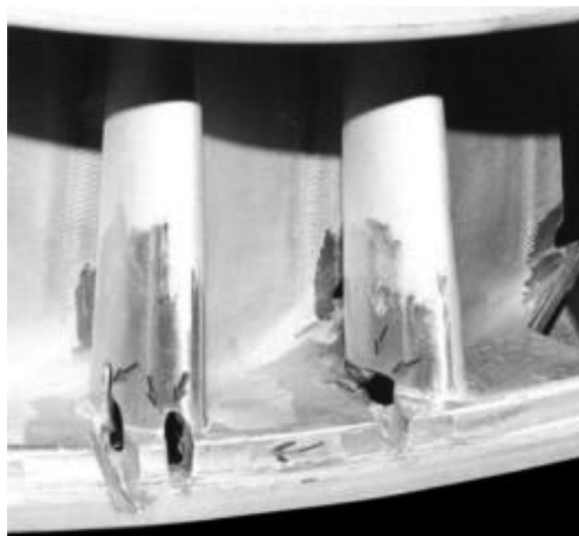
Frame 7EA first stage nozzle with cracks removed for LPM™ repair. (Source: Liburdi Engineering.)
